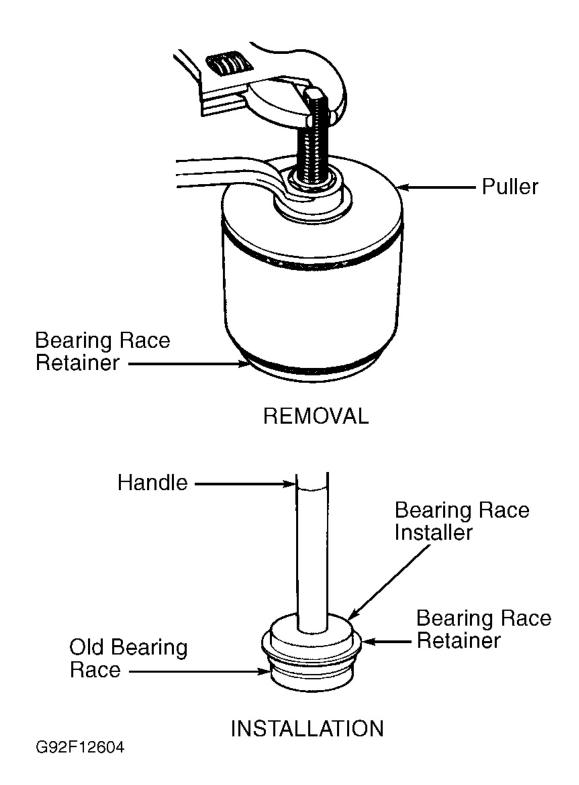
Removing & Installing Transfer Gear Bearing Courtesy of CHRYSLER CORP.
